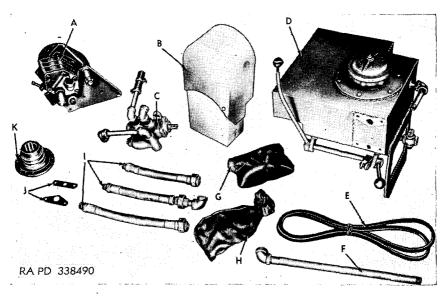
Internal parts for tank mounting bulldozer M1 or M1A1.
